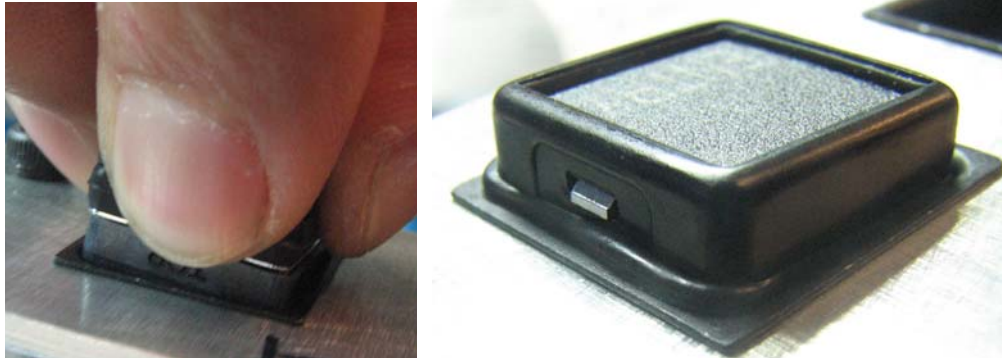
A AND FIGURE 4B – ENGAGING PUSHBUTTON
